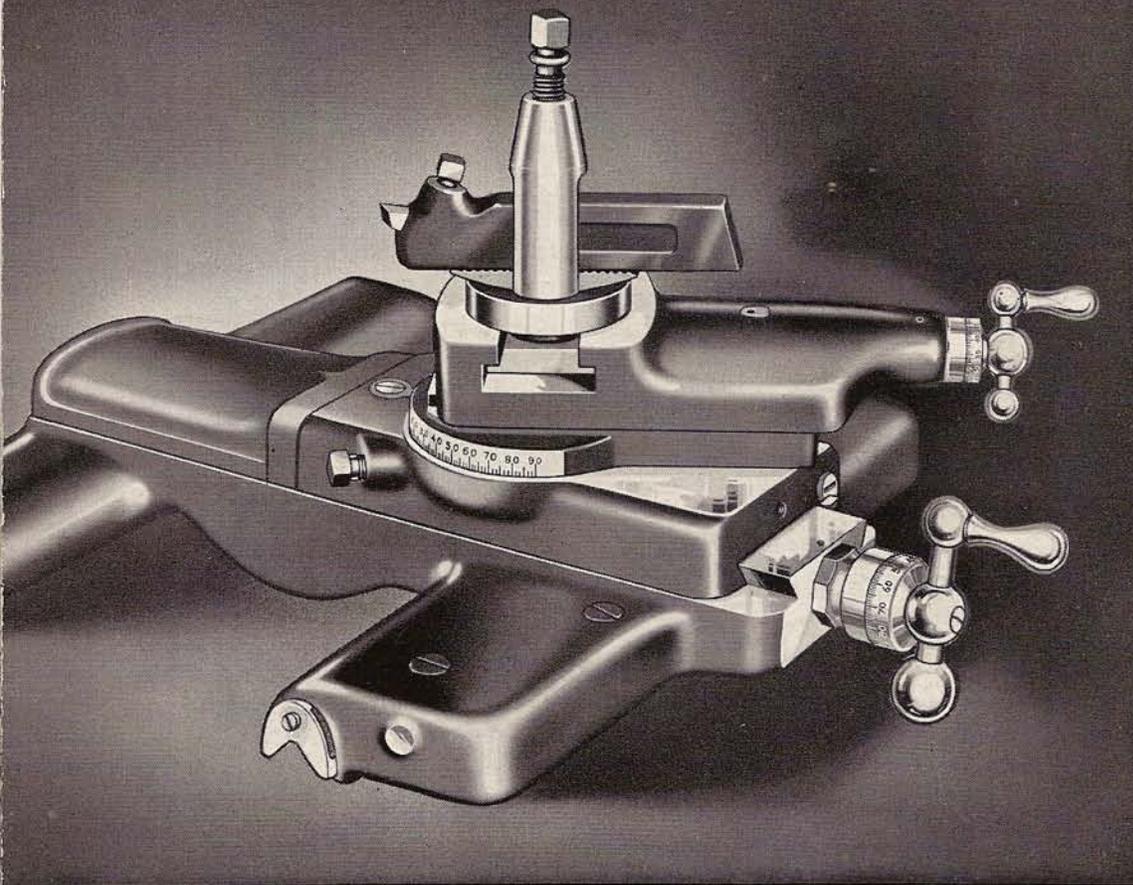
Improved Saddle and Compound Rest used on 13-inch South Bend Lathes
